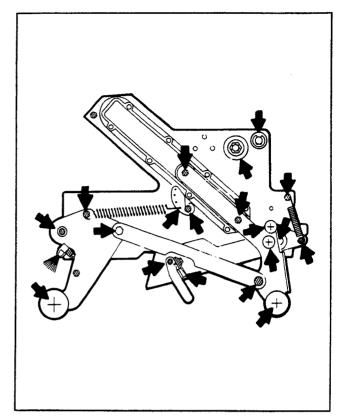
Lubrication Points - Top and Bottom Taping Heads
